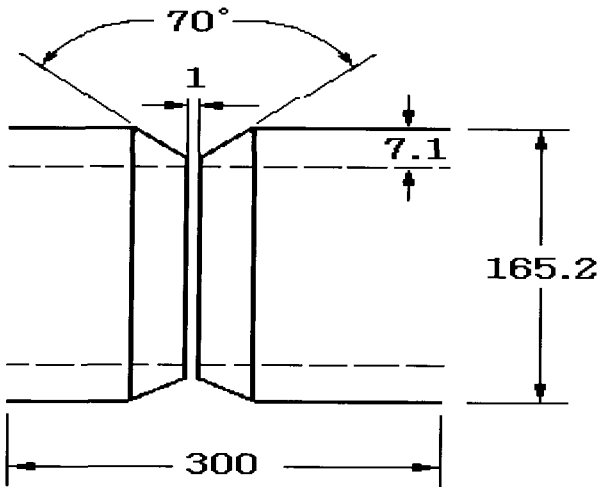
Schematic diagram of welding specimen of pipe
